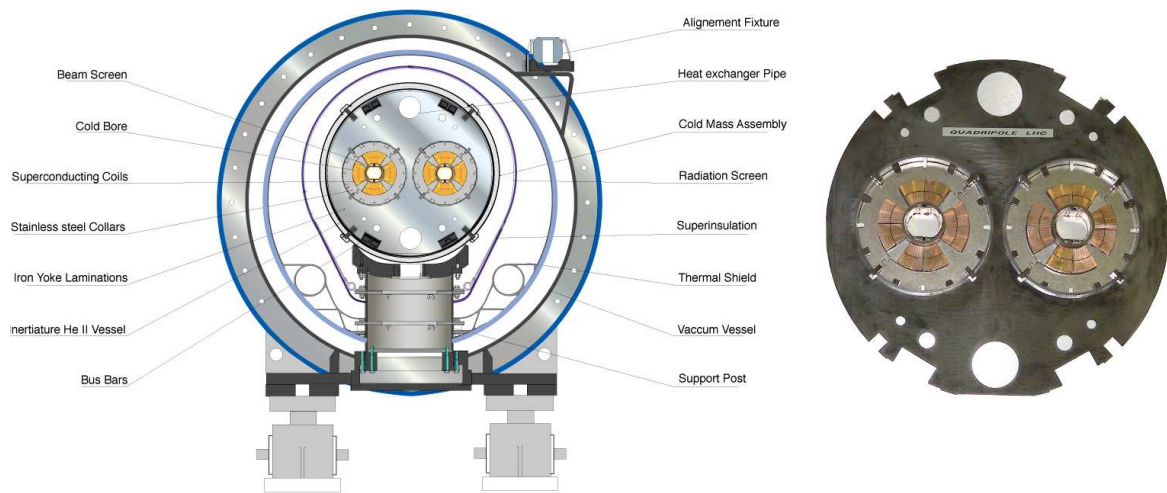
Cross section of the LHC main quadrupole assembly [82], together with a photo of an LHC MQ [83].
